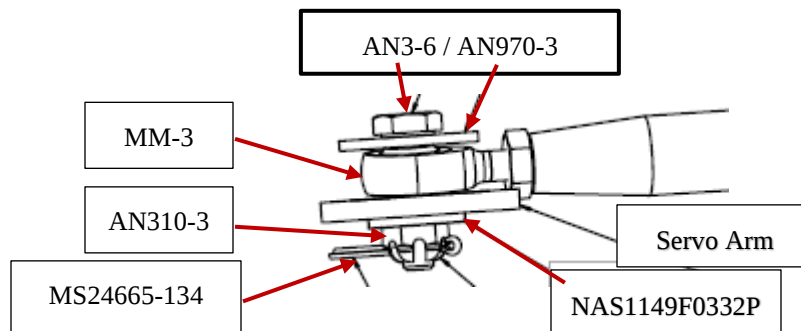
ROLL SERVO ARM INSTALLATION
